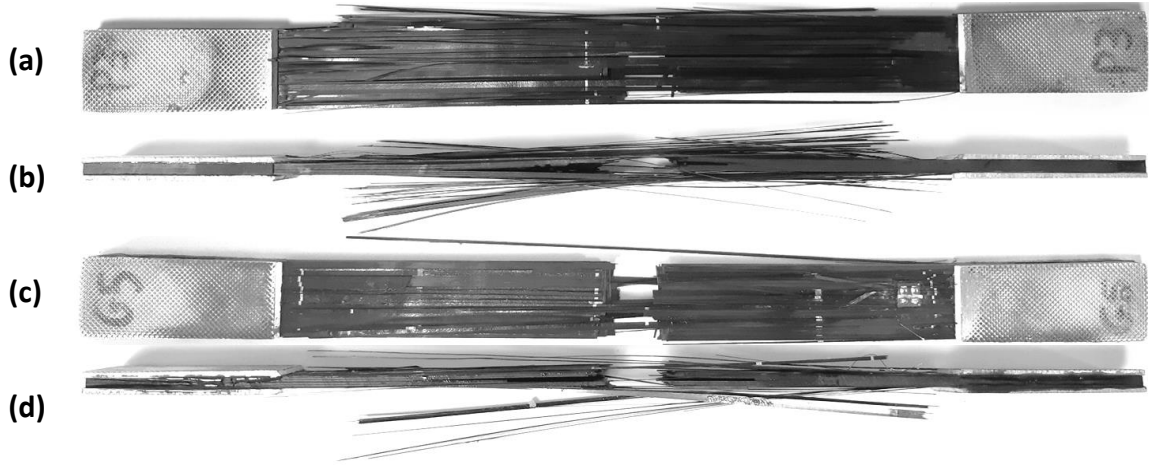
Tensile failure of specimens without BVID. Top view (a) and side view (b) of P-specimen, and top view (c) and side view (d) of G-specimen.
